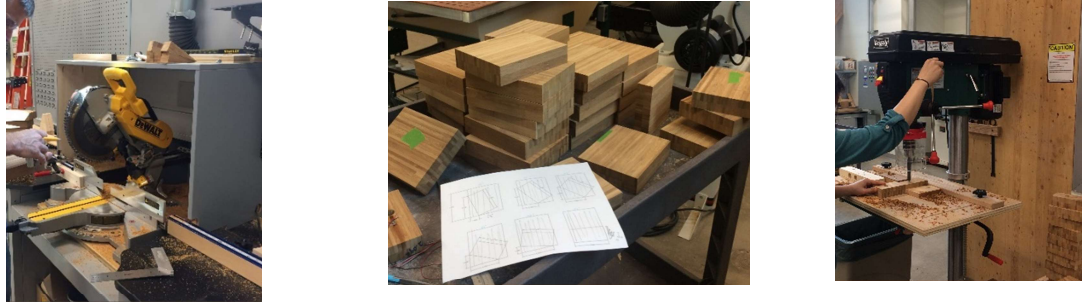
Miter saw, cut LVB Boards and vertical drilling machine
